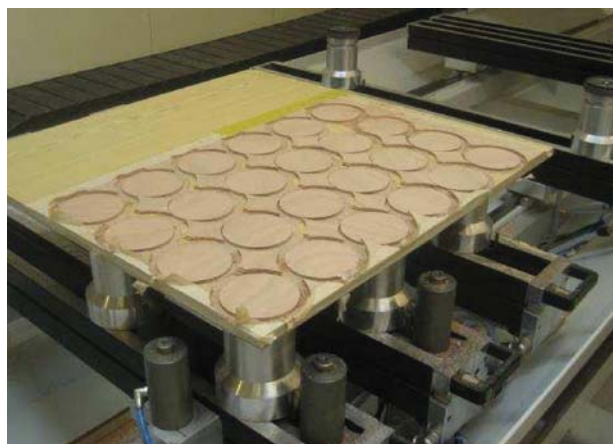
Cut of 24 circular specimens realized by means of a CNC milling cutter. Specimens were drilled and used for the Kundt's tube test.
